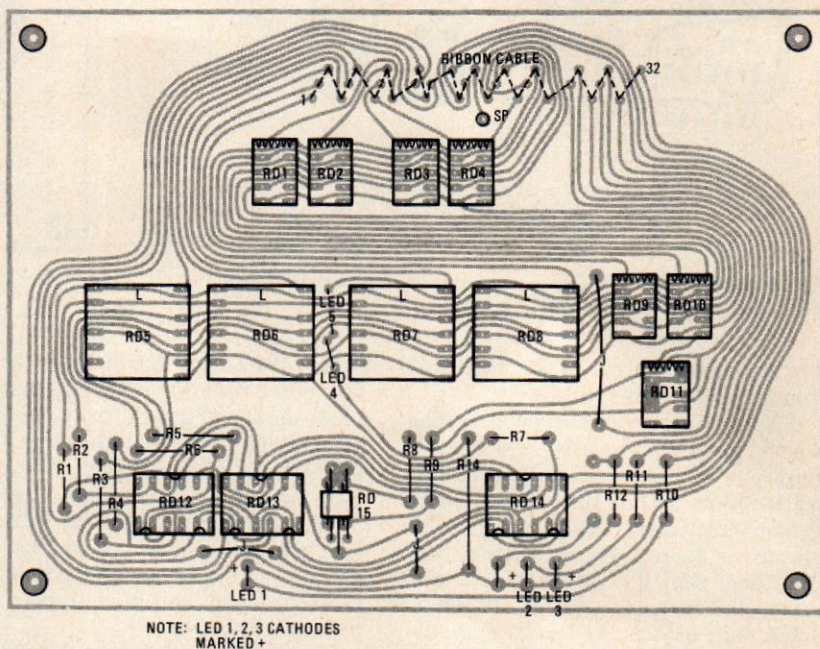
COMPONENT PLACEMENT diagram of display board.
